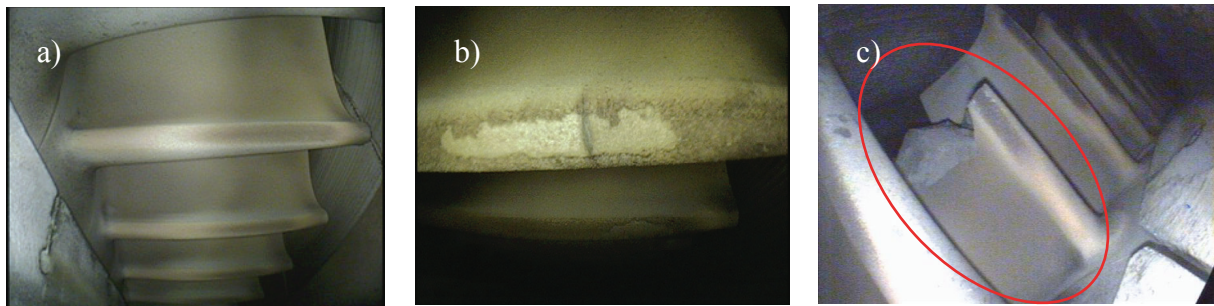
Examples of defects affecting rotor blades of a gas turbine: a) overheating of the material on the edge of attack; b) flaking of the blade surface and a crack on the edge of attack on the blade leaf; c) tear out of a blade leaf
